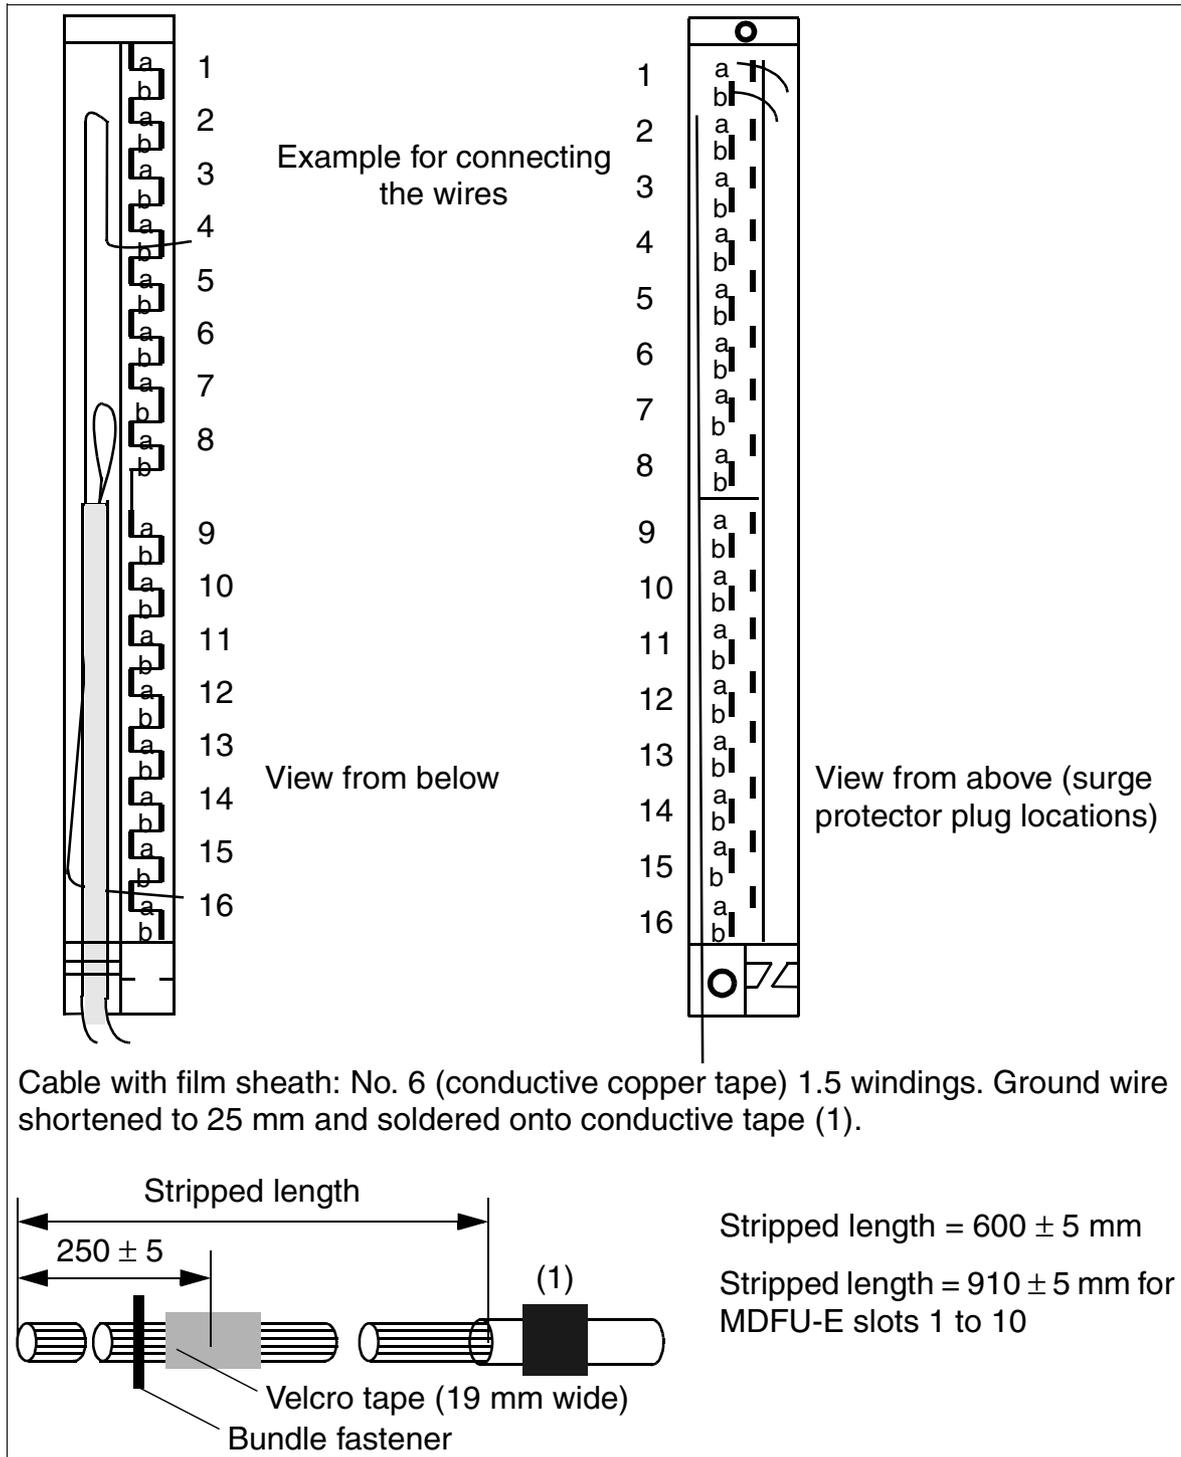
Stripping an Open-End Cable for the MDFU-E
